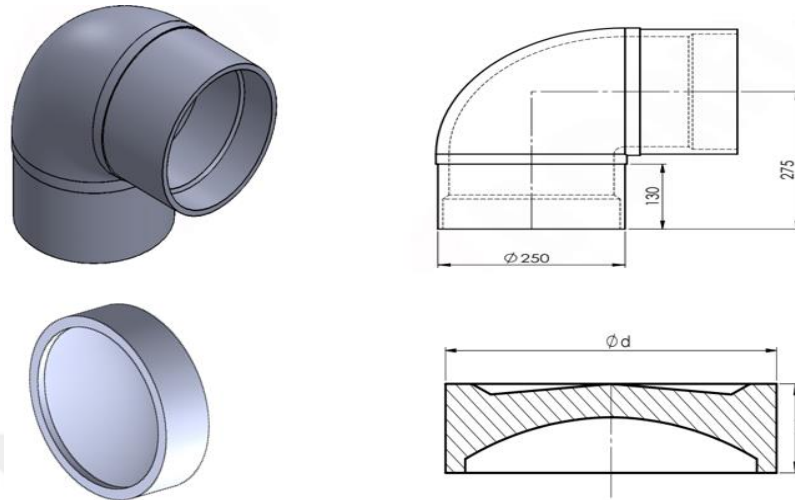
250-90° HDPE elbow and 250 end cap schematics and drawing before welding
